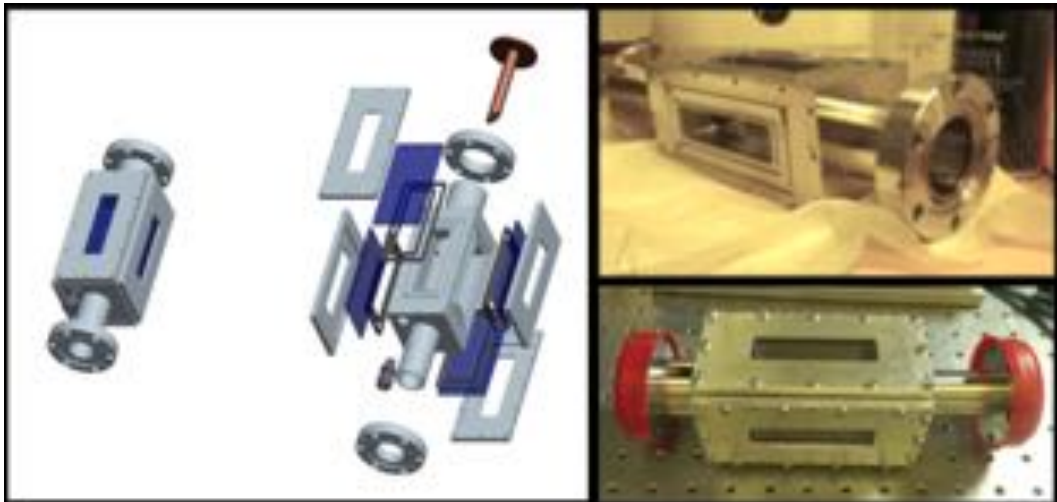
2D-MOT chamber of the vacuum system prior to assembly. Left - render of the assembled and exploded components of the 2D-MOT chamber, illustrating the double o-ring vacuum configuration and attachment points. Right - Actual chamber before and after assembly.
